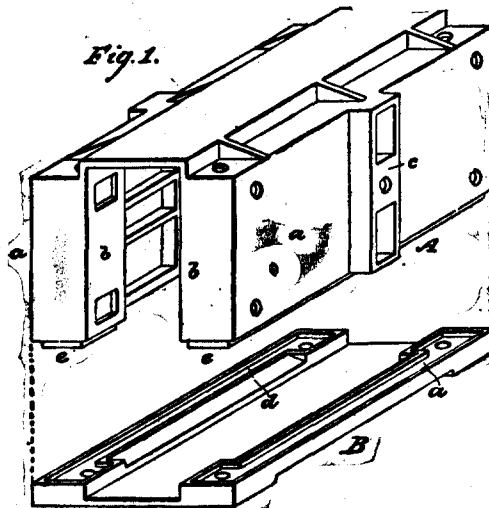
of the drawings here produced illustrates the casing and the bottom plate.
